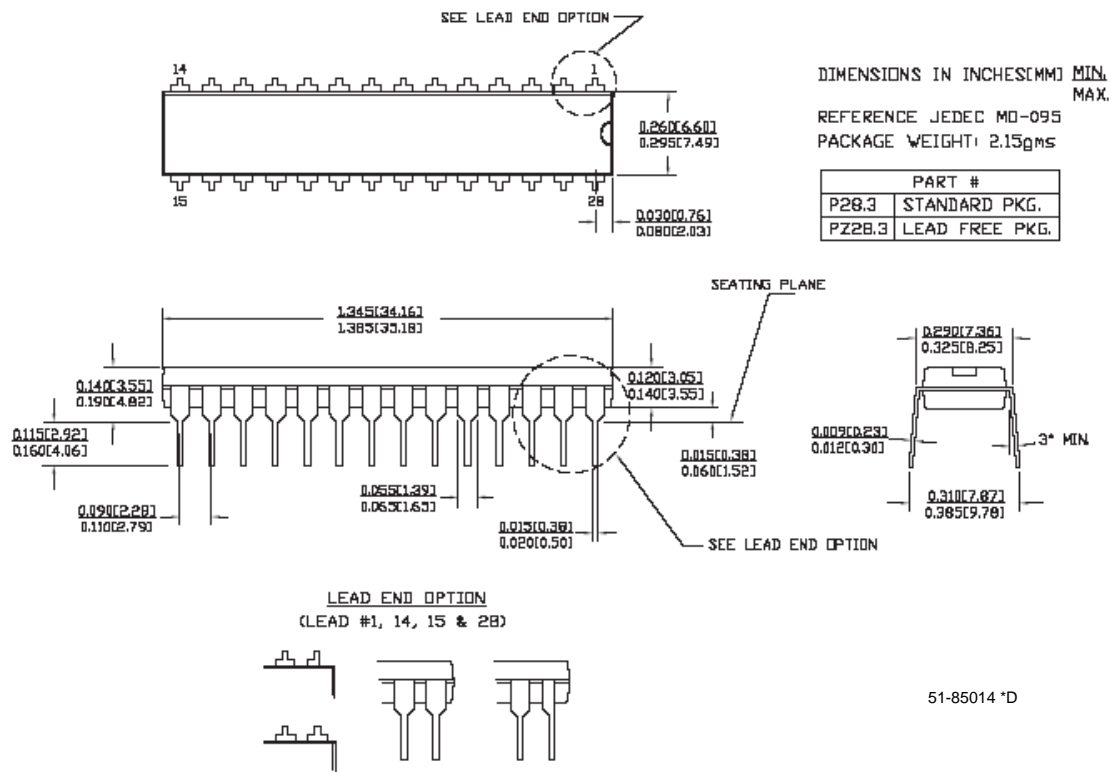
28-Lead (300-Mil) Molded DIP
